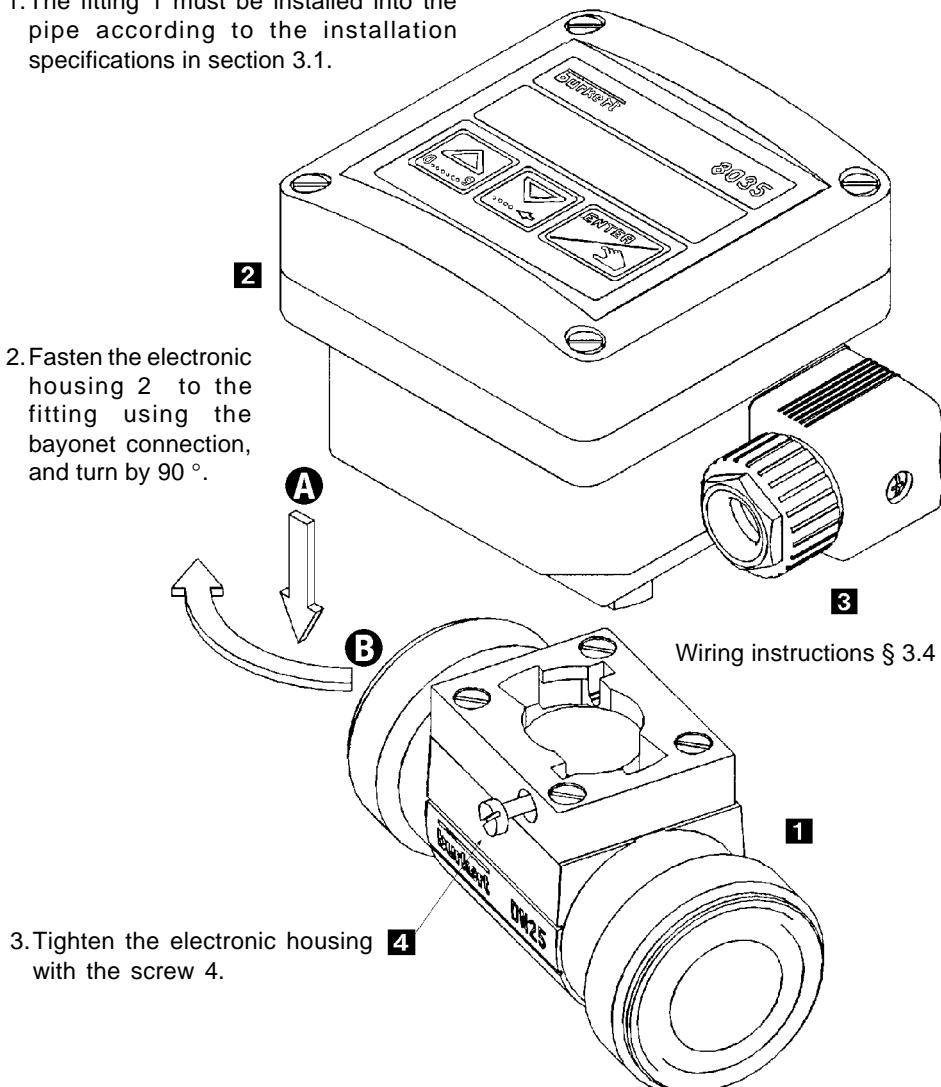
Flow transmitter type 8035 mounting diagram
